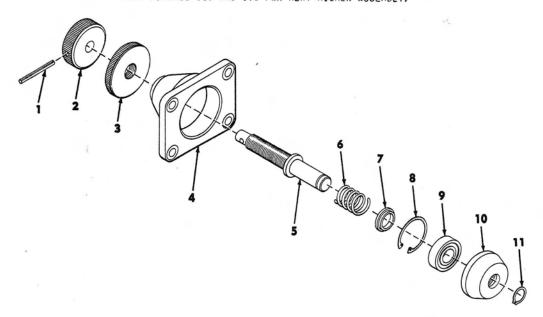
LUCK /7605971/-EXPLODED VIEW /SEE FIGURES 130 AND 178 FOR NEXT HIGHER ASSEMBLY/
